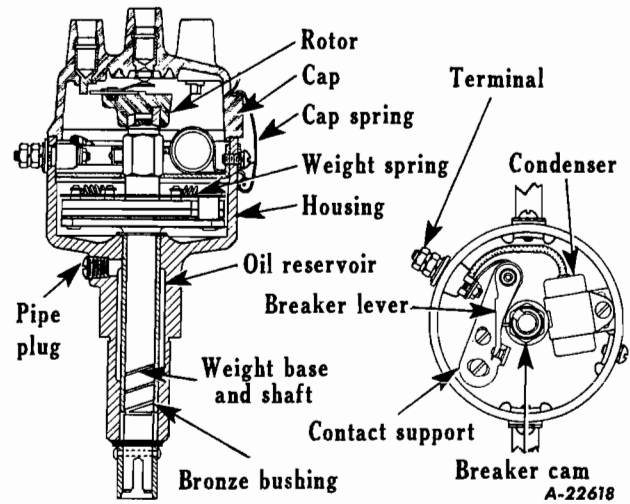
Sectional view of distributor. distributor directs the high voltage surge through the distributor rotor, cap and high tension wiring to the spark plug which is ready to fire.
